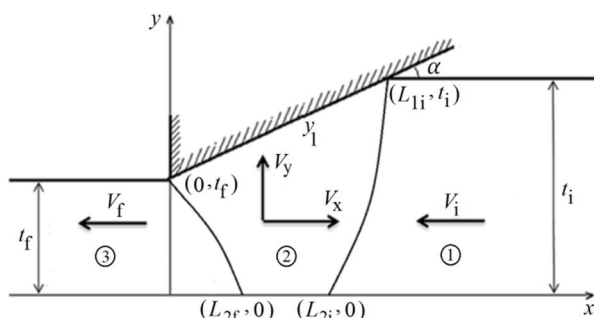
Sheet drawing process through wedge-shaped die, shear boundaries and deformation zone
